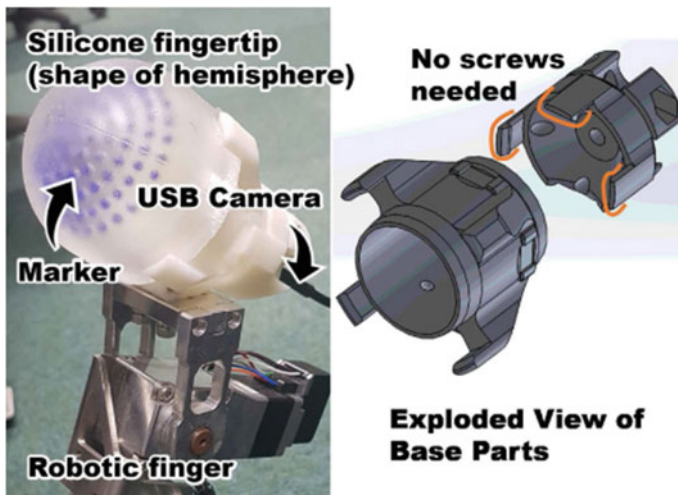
Visual-tactile sensor and the exploded view of base parts [48]
